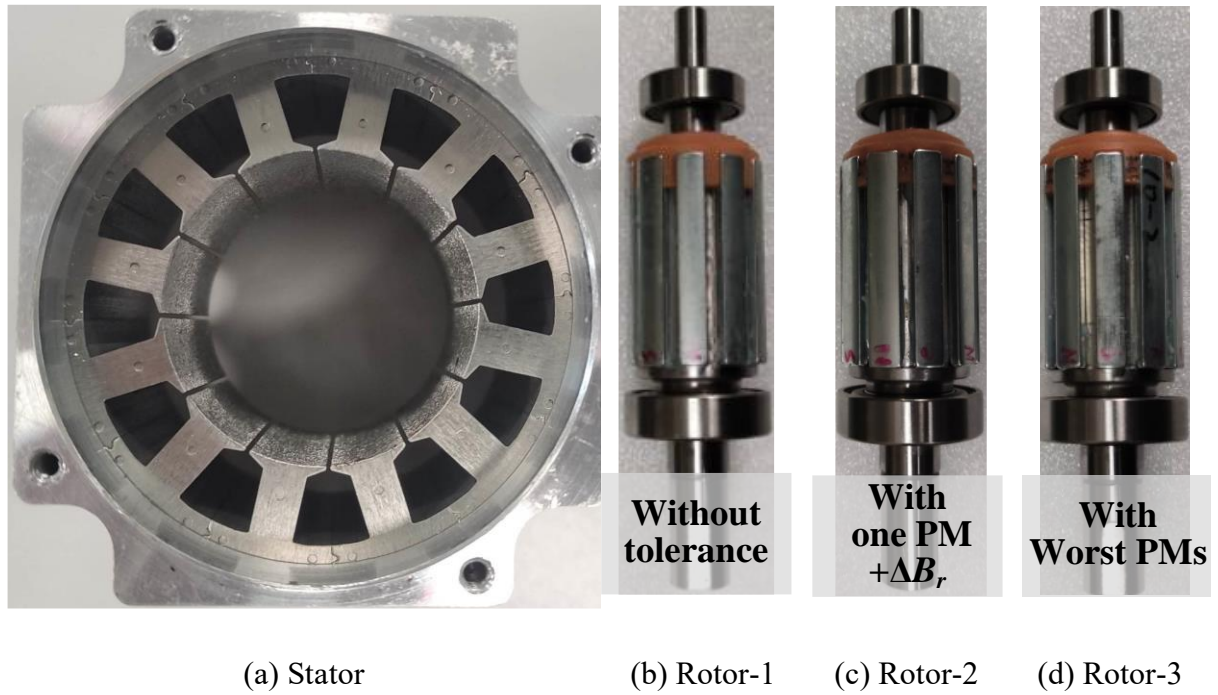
Prototypes of 12-slot/10-pole machine.
